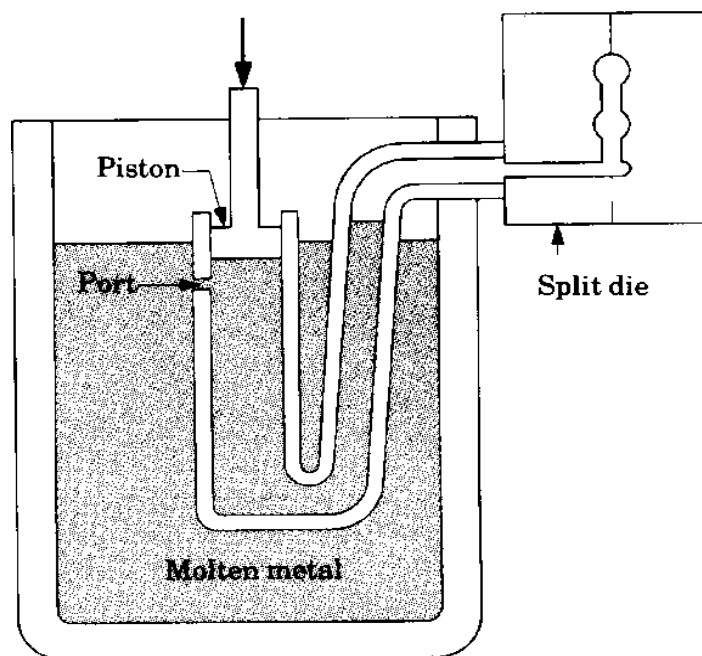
Plunger type hot-chamber die-casting Machine
